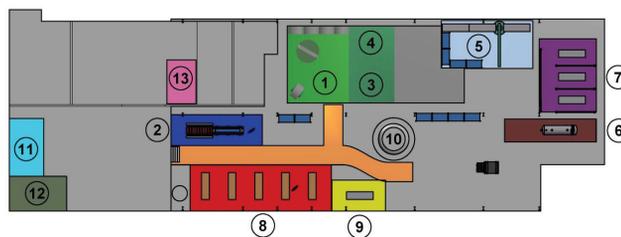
Manufacturing layout for SIS100 series production: 1 = winding, 2 = baking press, 3 = coil insulation, 4 = electric tests of coils, 5 = yoke stacking, 6 = yoke heat treatment, 7 = assembly half-yokes, 8 = assembly cold mass into cryostat, 9 = geometrical measurements, 10 = coil He leak test, 11 = pre-manufacturing of busbars, 12 = component leak test, 13 = thermal shield manufacturing
